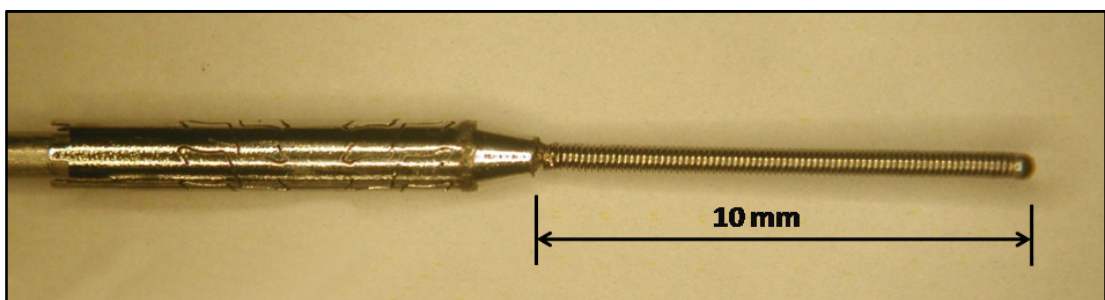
INTERMEDIATE GUIDE TIP ASSEMBLED WITH CONICAL SHAFT
